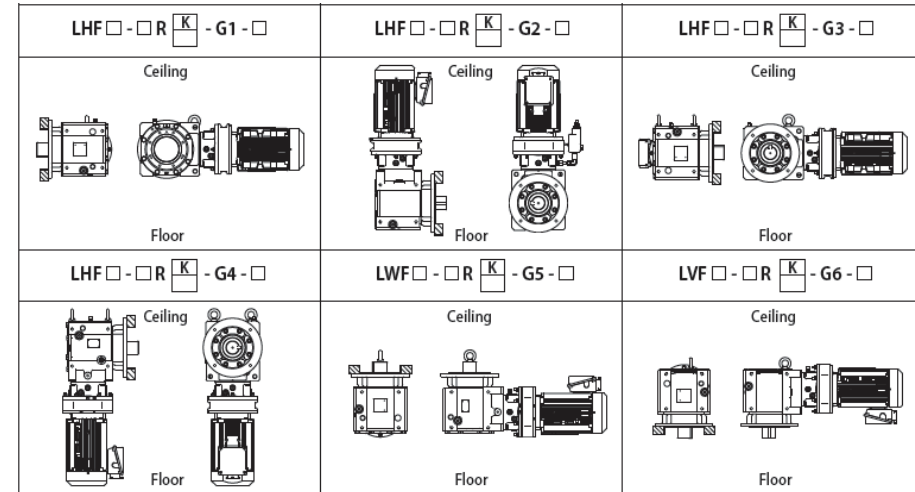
Double Extended Solid Output Shaft (T) - Output Flange Left
